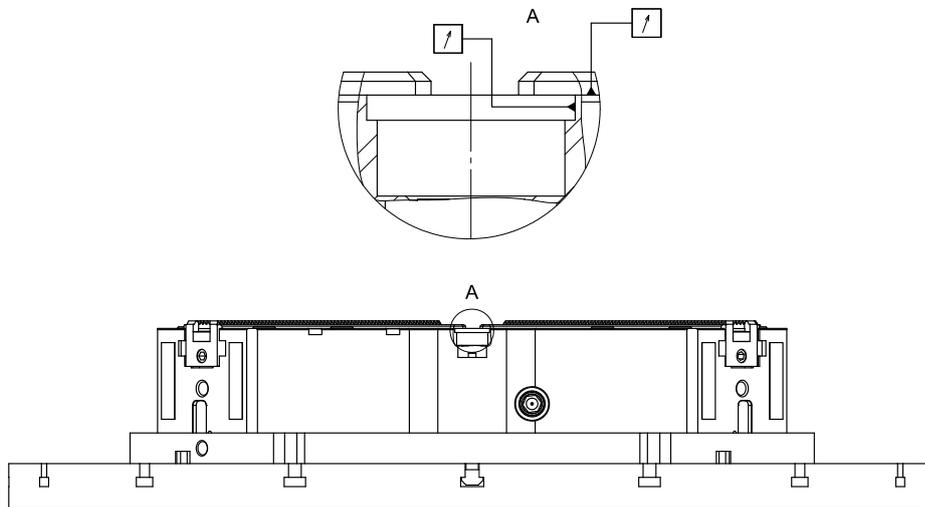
Checking concentricity and axial run-out of the chuck
